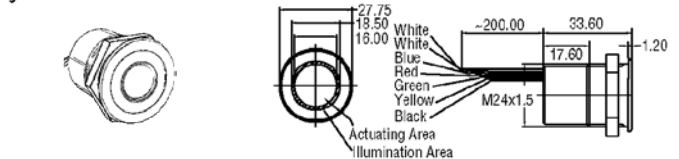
Vandal-Proof Piezo Switch (Metal/Point Illumination)
